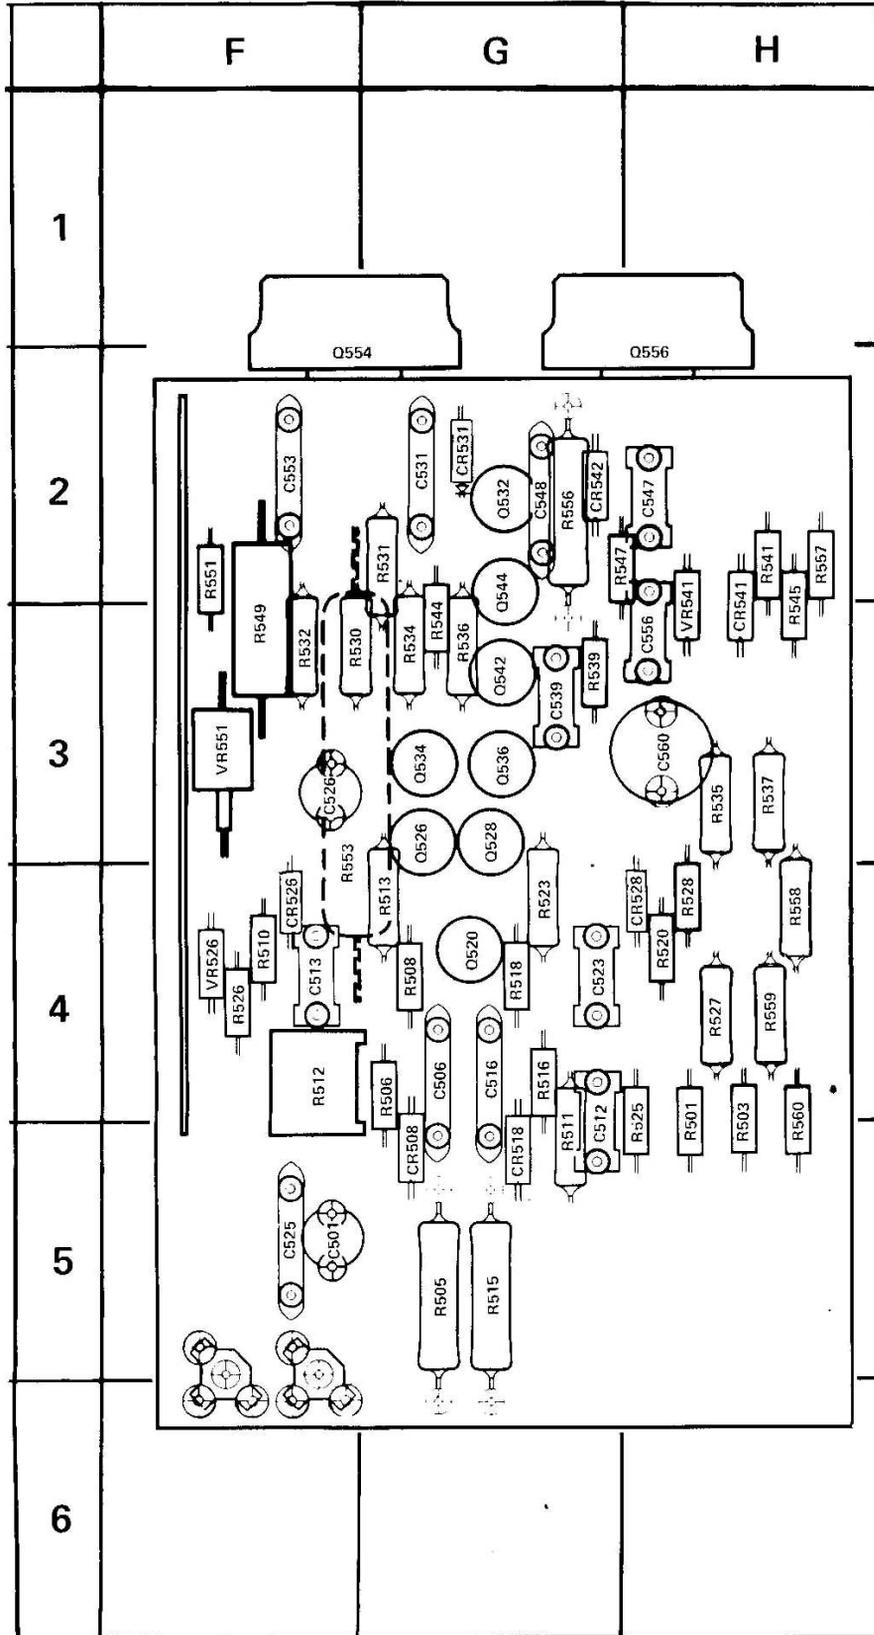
603/604 Z-Axis Board component location grid.
